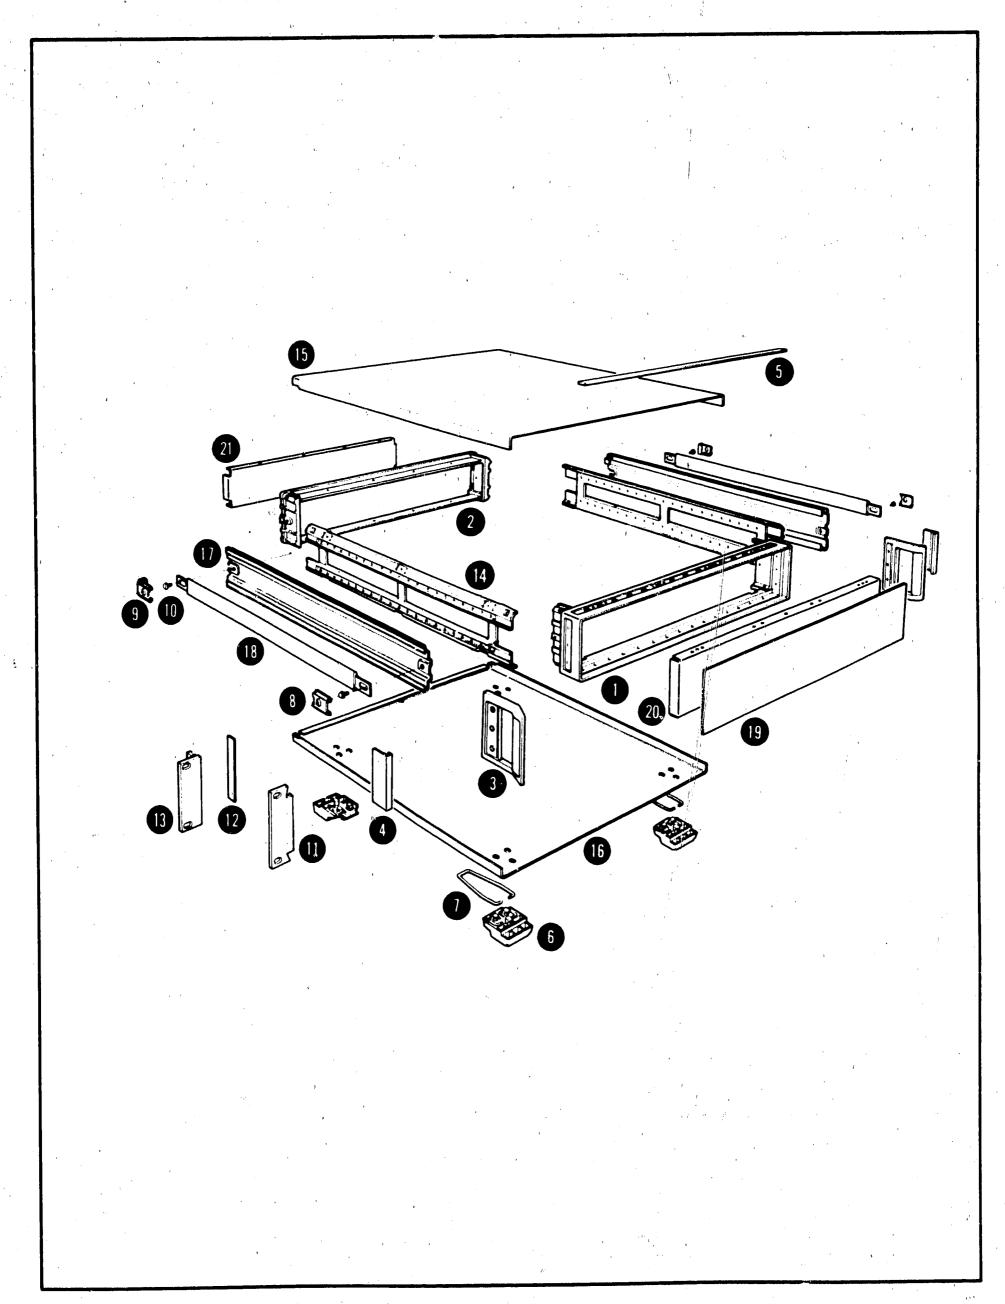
Cabinet Parts, Exploded View (1 of 2)
